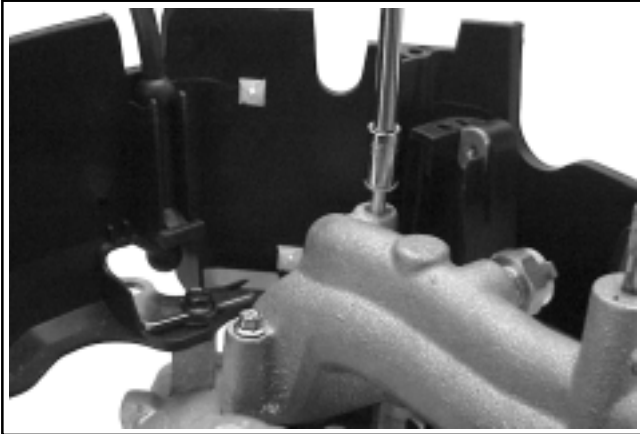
Removing By-pass Hose and Wiring Harness.
